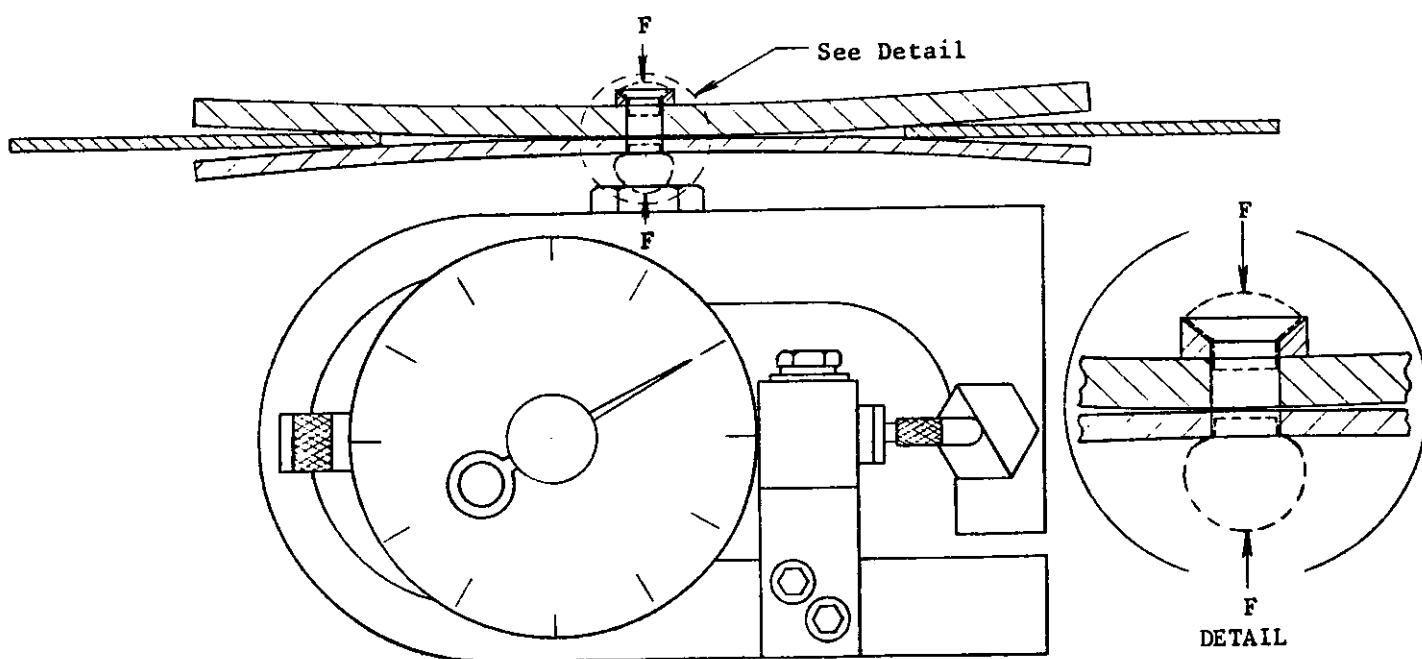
Test specimen with load applied via "slugs" representative of manufactured and blind head bearing areas.
